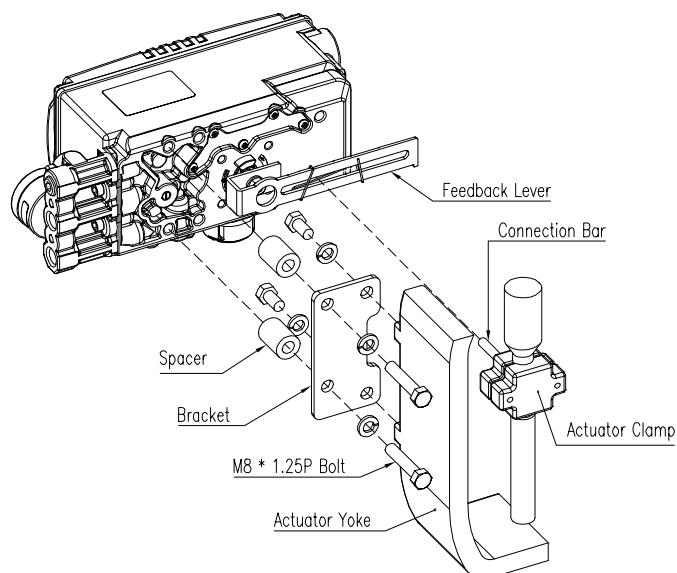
YT-3300L / 3350L (Standard Lever Type)
